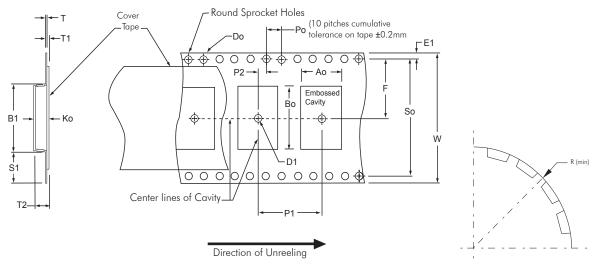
Standard Embossed Carrier Tape Dimensions
